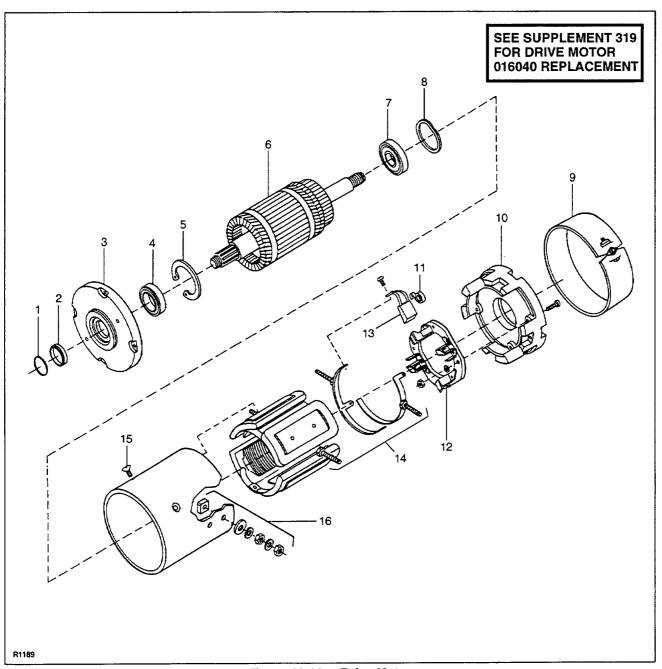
Drive Motor 016042-12 Volt 333583 and Higher 016039-12 Volt 333328 to 333582 016040-24 Volt 333328 to 333561 016045-24 Volt 333562 to 344055 016050-24 Volt 344056 and Higher
